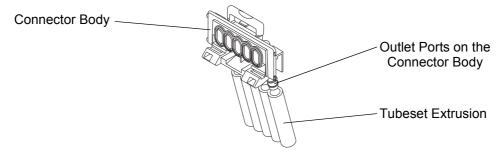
Removing the Connector Body from the Tubeset Extrusion
